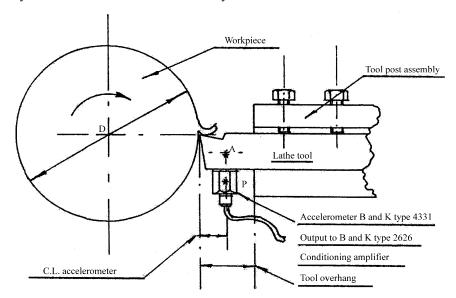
Details of tool overhang and accelerometer position (axial mounting A, vertical mounting P)
